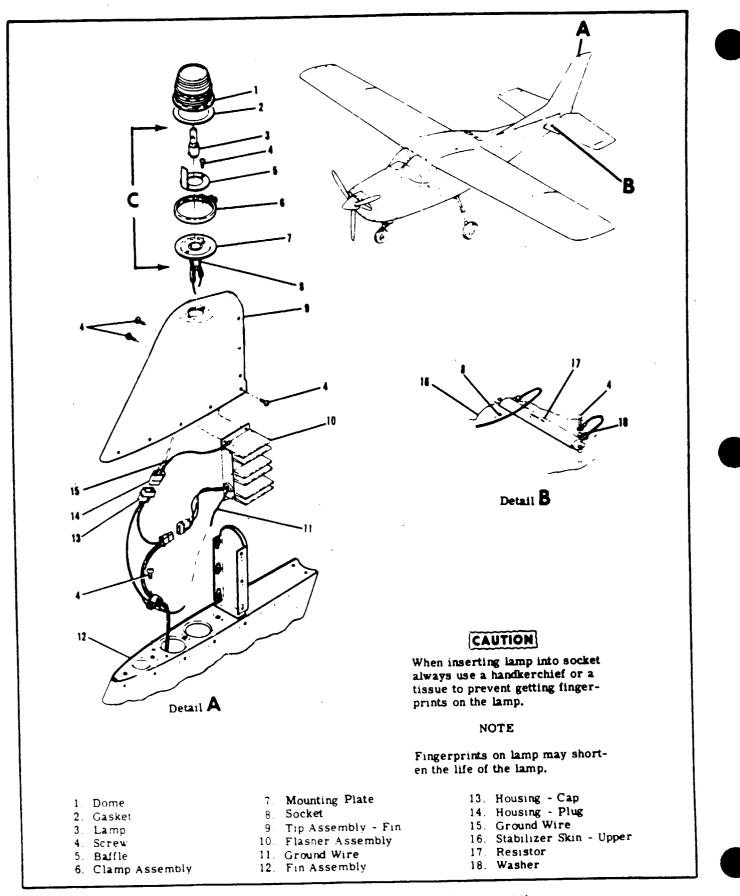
Flashing Beacon Installation (Sheet 1 of 2)
